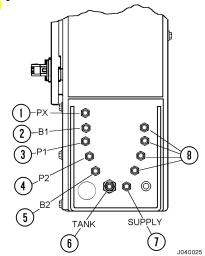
Brake Cabinet Port Indentification (Viewed from End of Cabinet)
